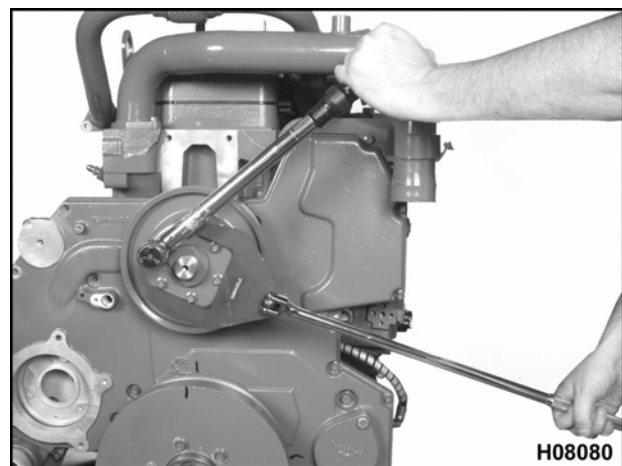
Torquing the fan drive mounting bolts (typical)
